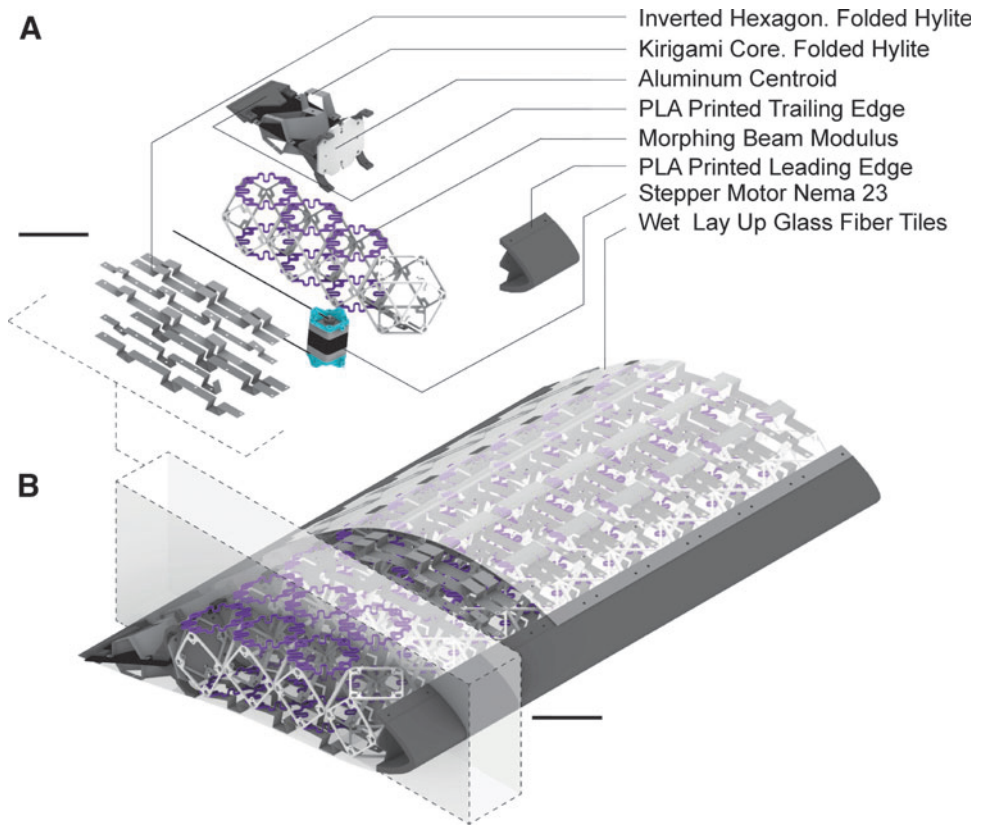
Digital morphing wing system architecture. (A) Exploded isometric view of a wing section. Scale 75 mm. (B) Isometric view of the full assembly. Scale 75 mm.
